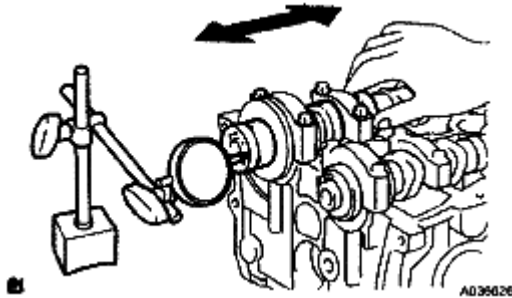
Measuring Thrust Clearance While Moving Camshaft Back And Forth
